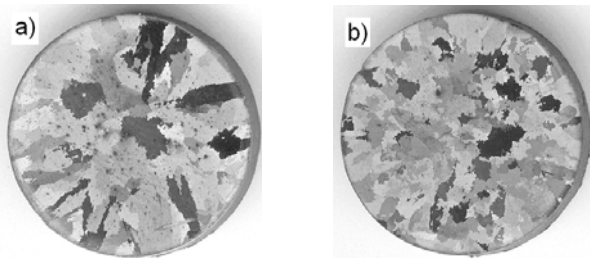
Macrostructure of casting made from IN-100 alloy in primary state (a) and after fourth remelting (b)
